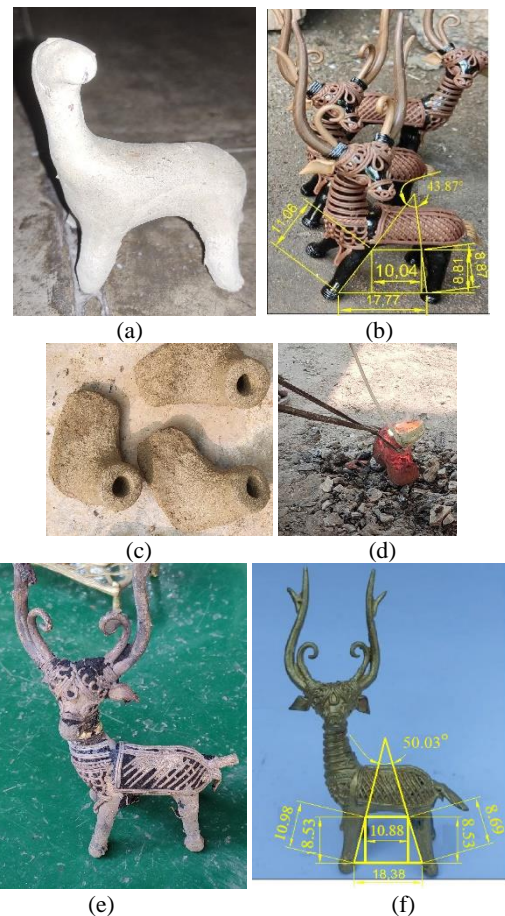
Different steps of Dokra casting (a) Core (b) wax pattern over clay core (c) Clay mould with gating system (d) Pouring of liquid metal (e) Unfinished casting (f) Final product
